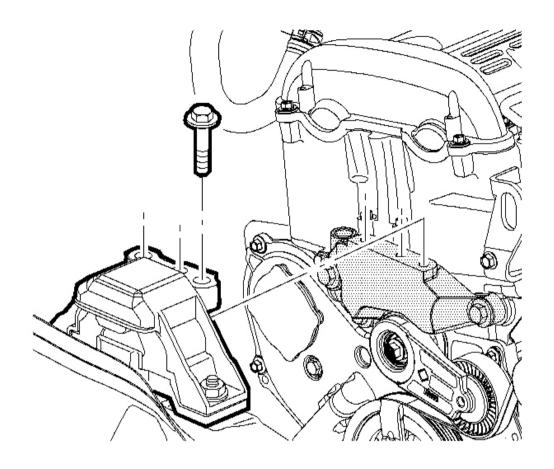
Right Engine Mount, Bracket & Bolts Courtesy of GENERAL MOTORS CORP.
